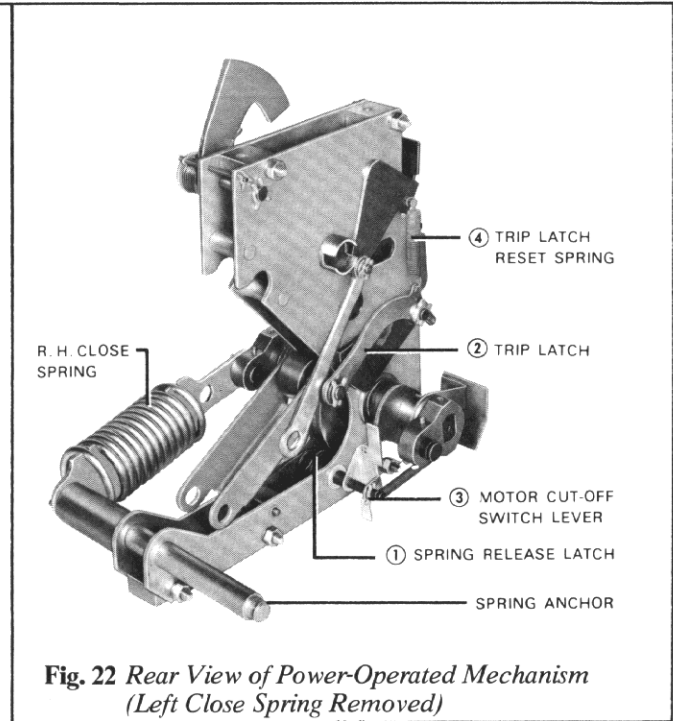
Rear View of Power-Operated Mechanism (Left Close Spring Removed)
